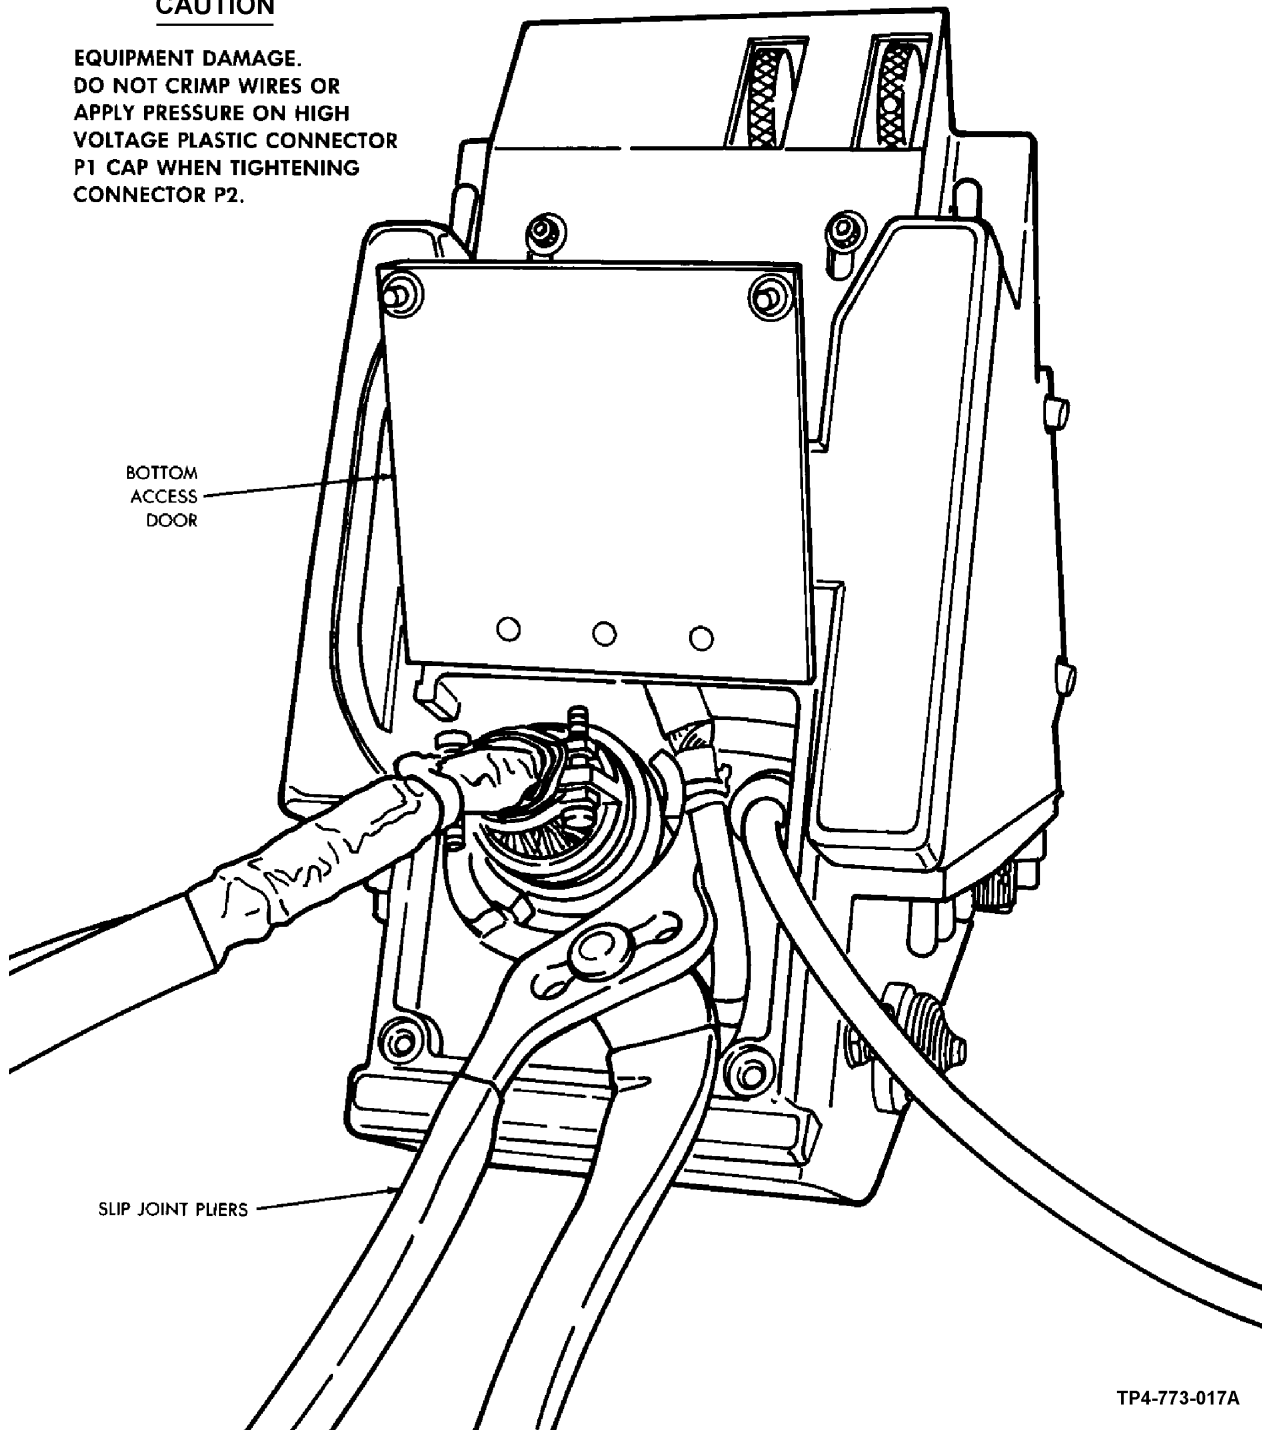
Control Panel Assembly Connector J1 and J2 Locations
